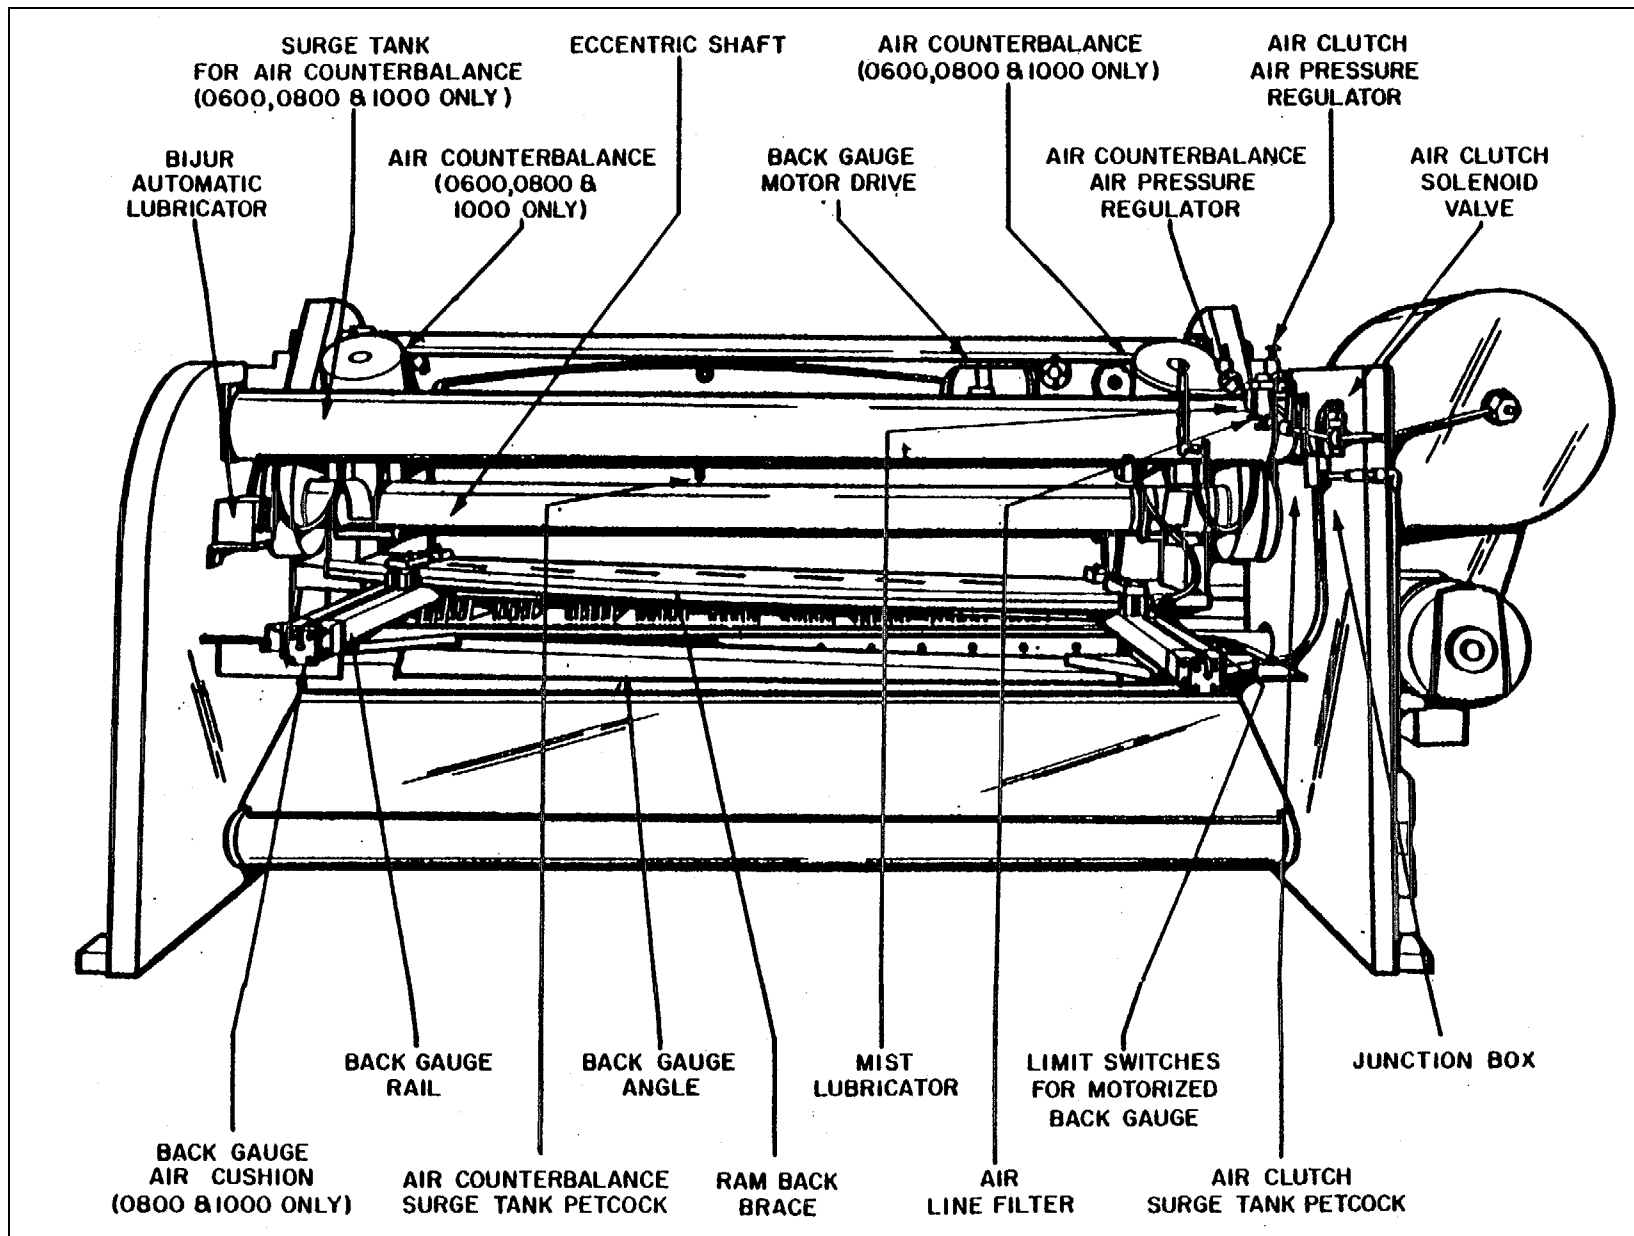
0800 Series, Power Squaring Shear (Rear View)
